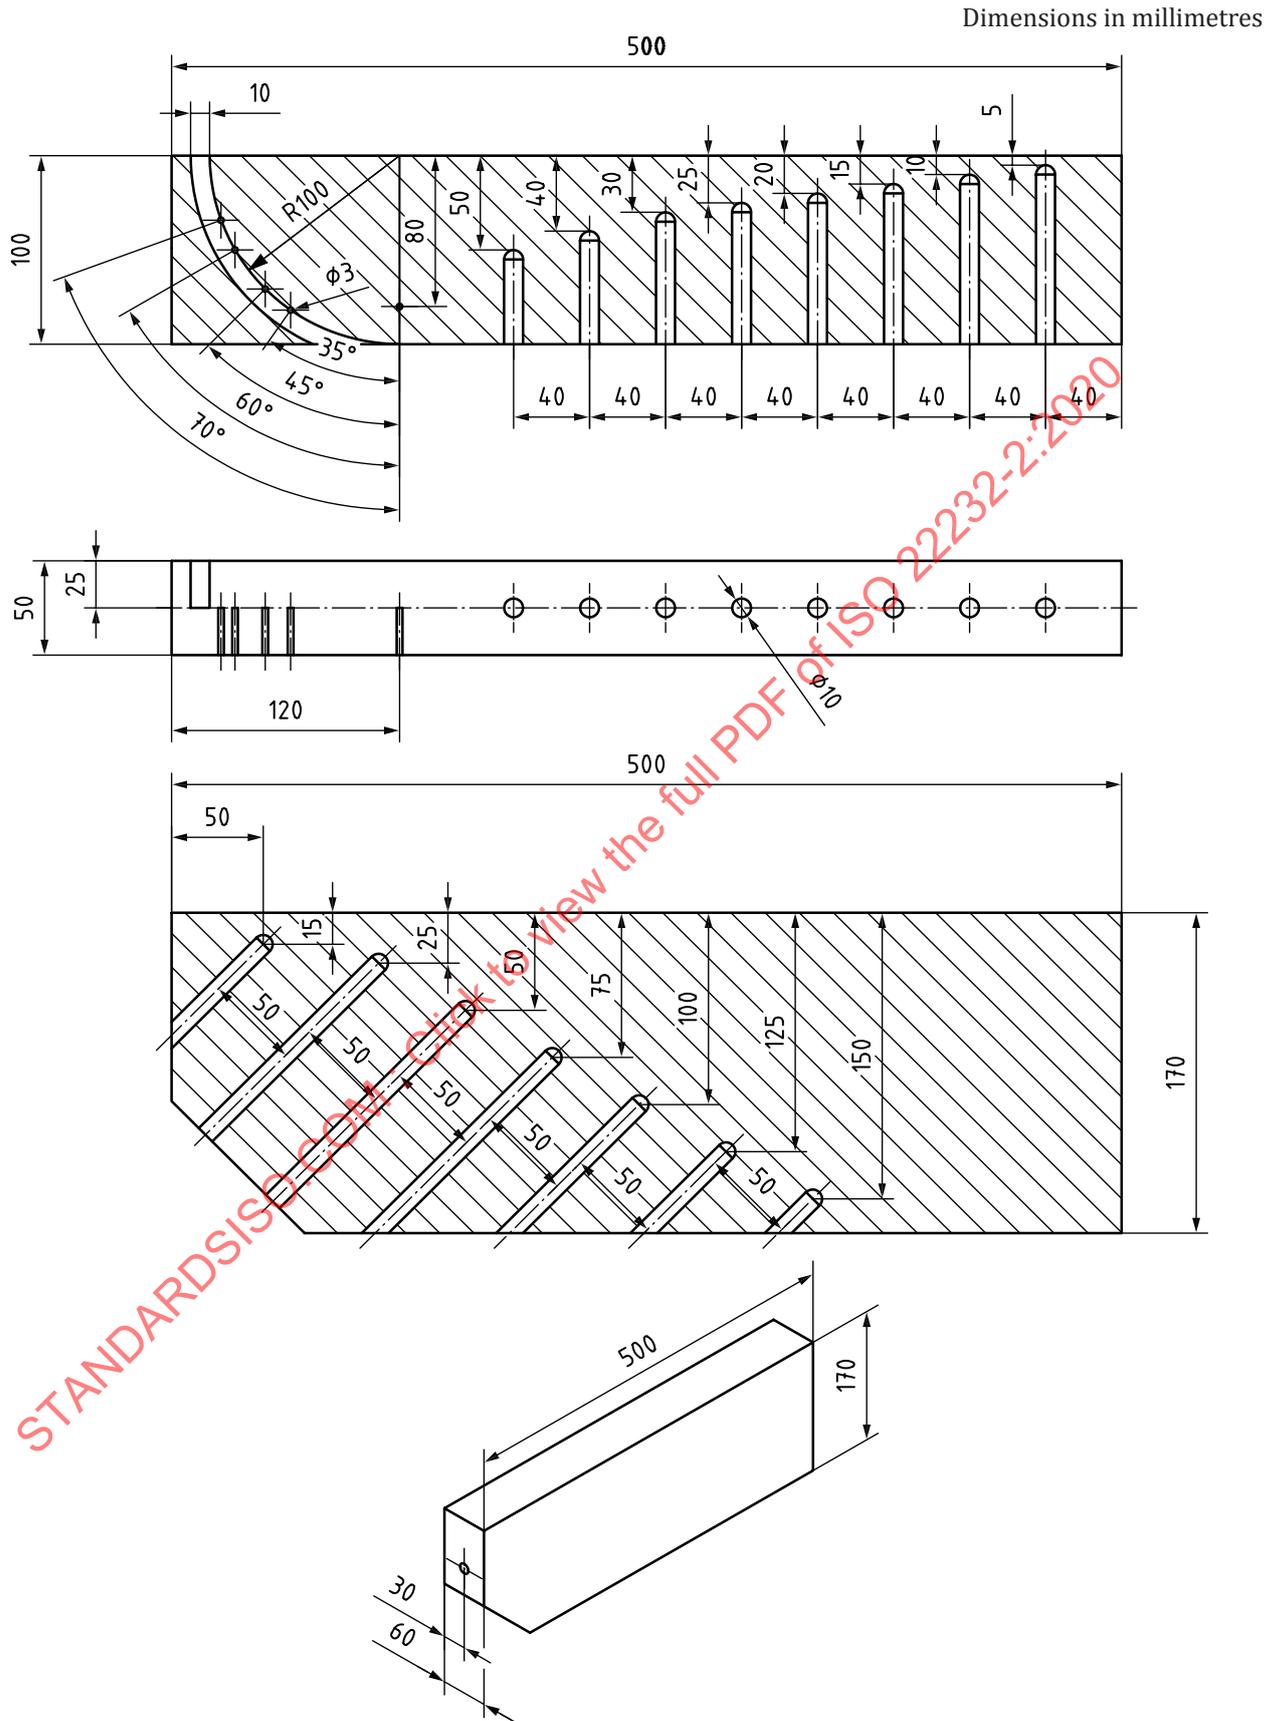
Examples of test blocks with side-drilled and hemispherical-bottomed holes
